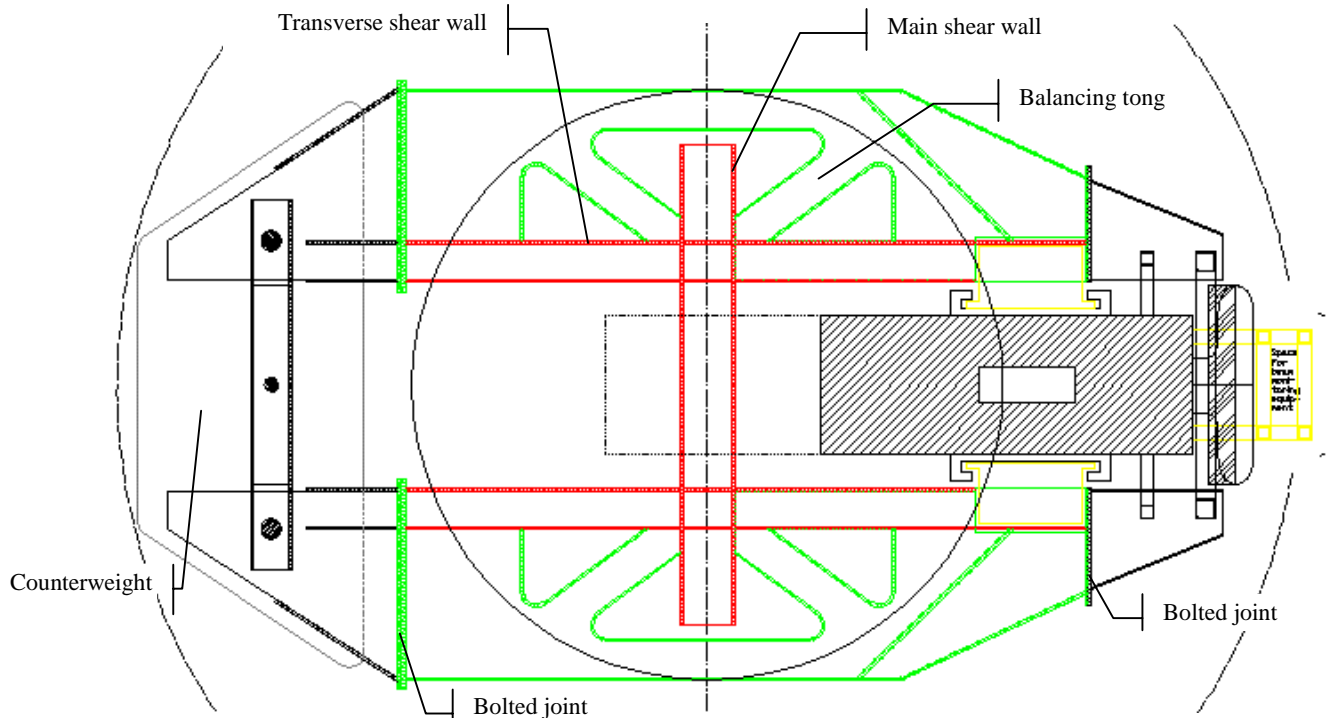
Vertical section through the balancing tongs of the cage (horizontal gantry position). For better orientation the shape of the front ring is indicated. The vertical box in the centre is the main shear wall, to which only the inner girder of each tong is welded. The inner girders also form part of the transverse shear walls. The type of fixation of the dipole to the tongs is schematically indicated. The outer prolongation of the tongs on the right hand side is optional. The structure farthest right is bolted to the dipole face and cantilevers into the patient cabin, giving support to the beam monitoring equipment and the photogrammetric cameras.
